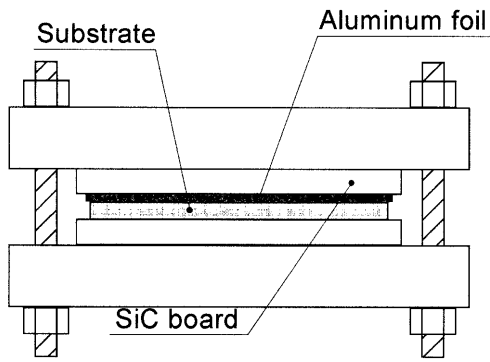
Jig for the aluminumizing process using aluminum foil.
